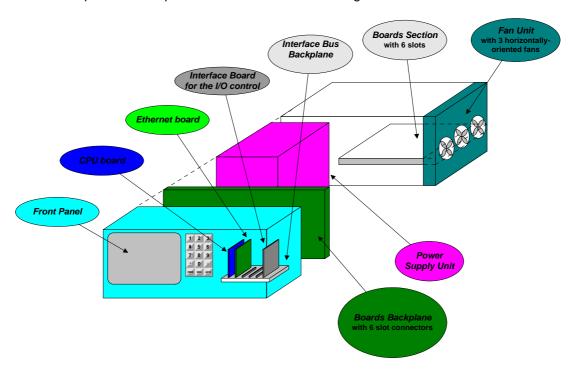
Details of the mechanical parts contained in the SY2527 mainframe
